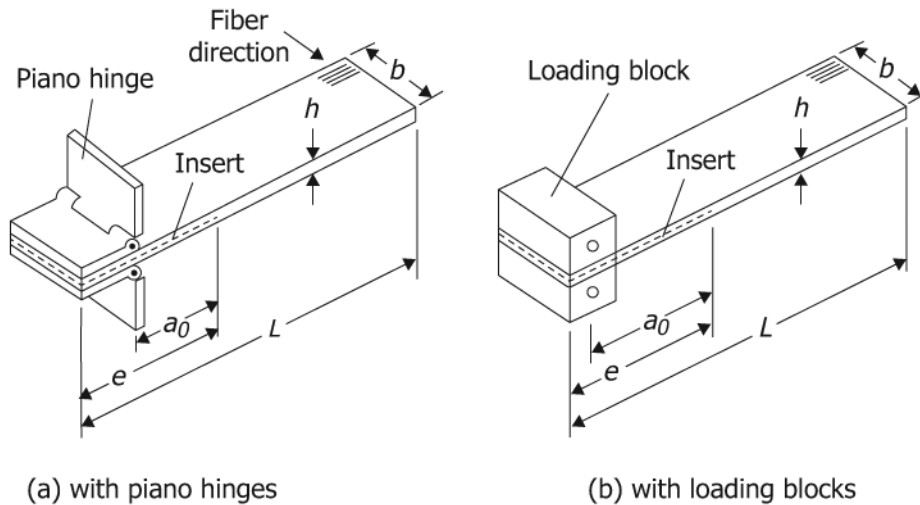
~~Double~~ Double Cantilever Beam Specimen
